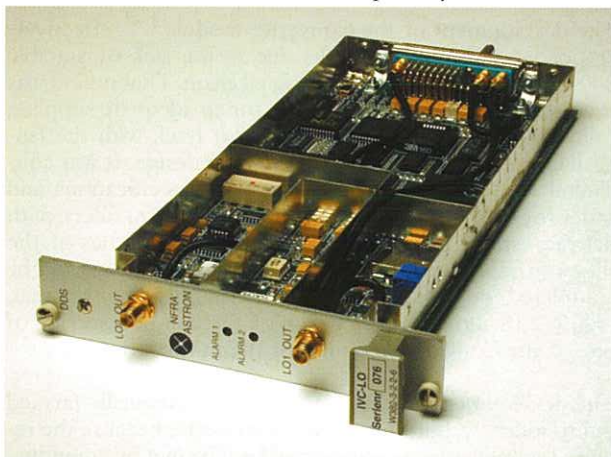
An assembled LO-module on a six-layer printed circuit board.
